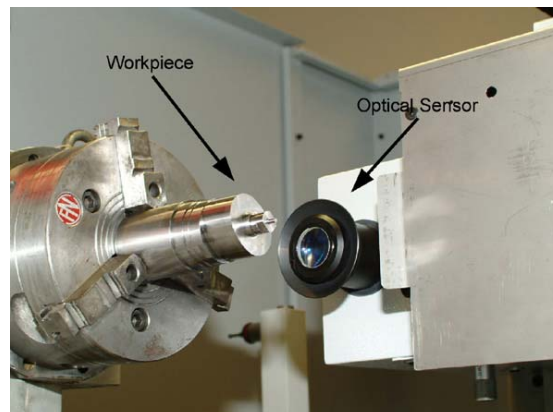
Cylindrical grinding machine with integrated optical sensor and workpiece [122].
